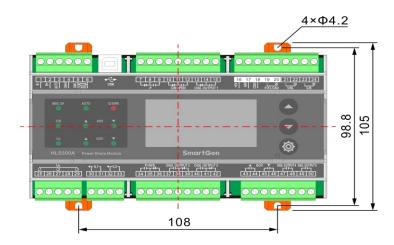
Fig. 6 – Overall Dimensions (Unit: mm)
